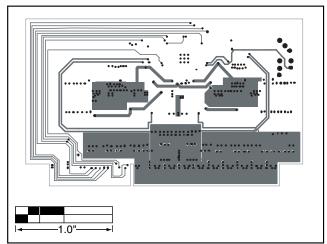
MAX5037 EV Kit PC Board Layout—Inner Layer 3
